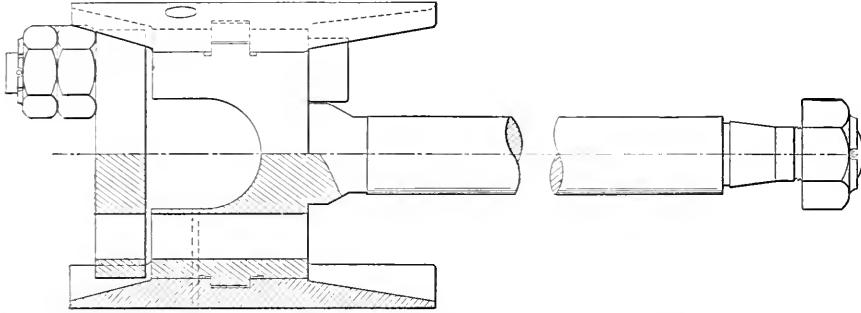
CROSSHEAD AND PISTON ROD FORGED IN ONE PIECE
